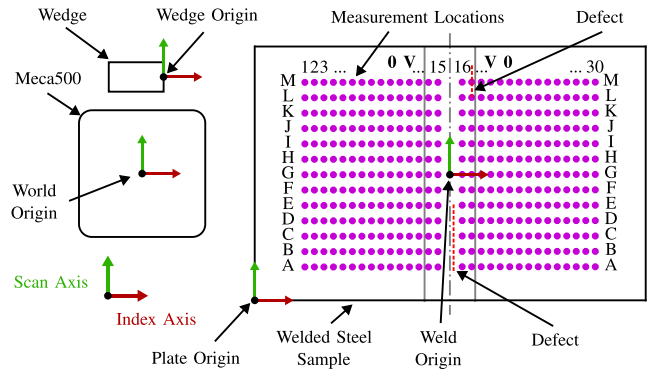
Topographical diagram of the experimental setup with origins of the world, wedge, plate, and weld marked, in addition, the approximate defect locations and measurement locations are also marked.
